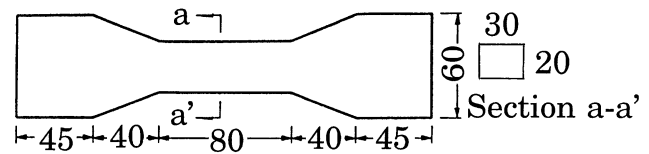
Specimen configuration. Dimensions are in millimeters.
